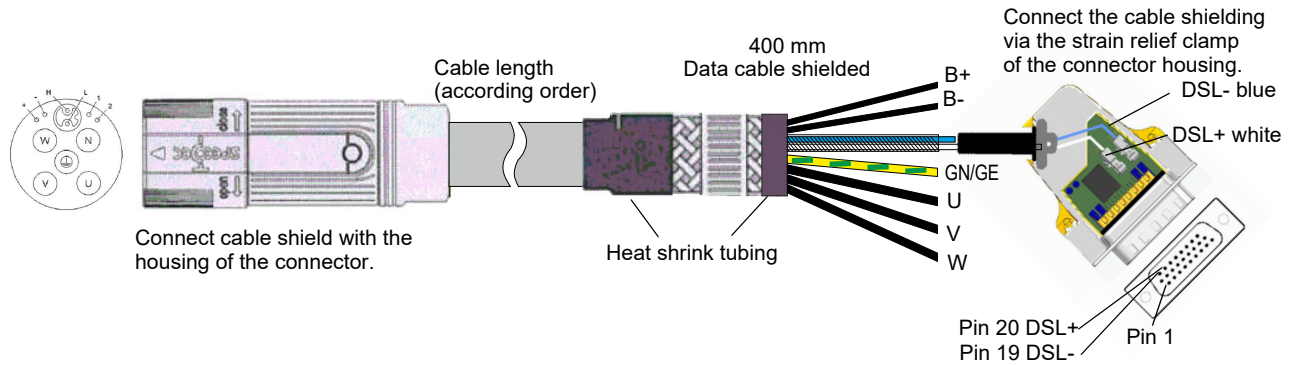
Motor cable with HIPERFACE DSL® 21 A
